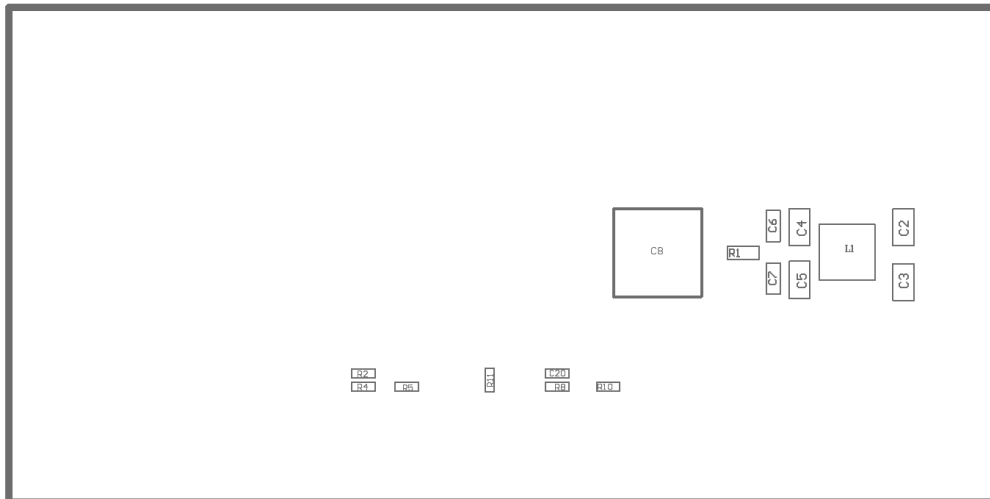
Bottom Assembly (Bottom View), LM63460EVM-2MHZ
